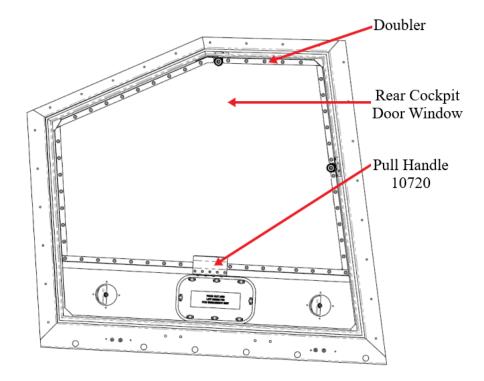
Pull Handle and Doublers on Rear Cockpit Door (Inside View)
